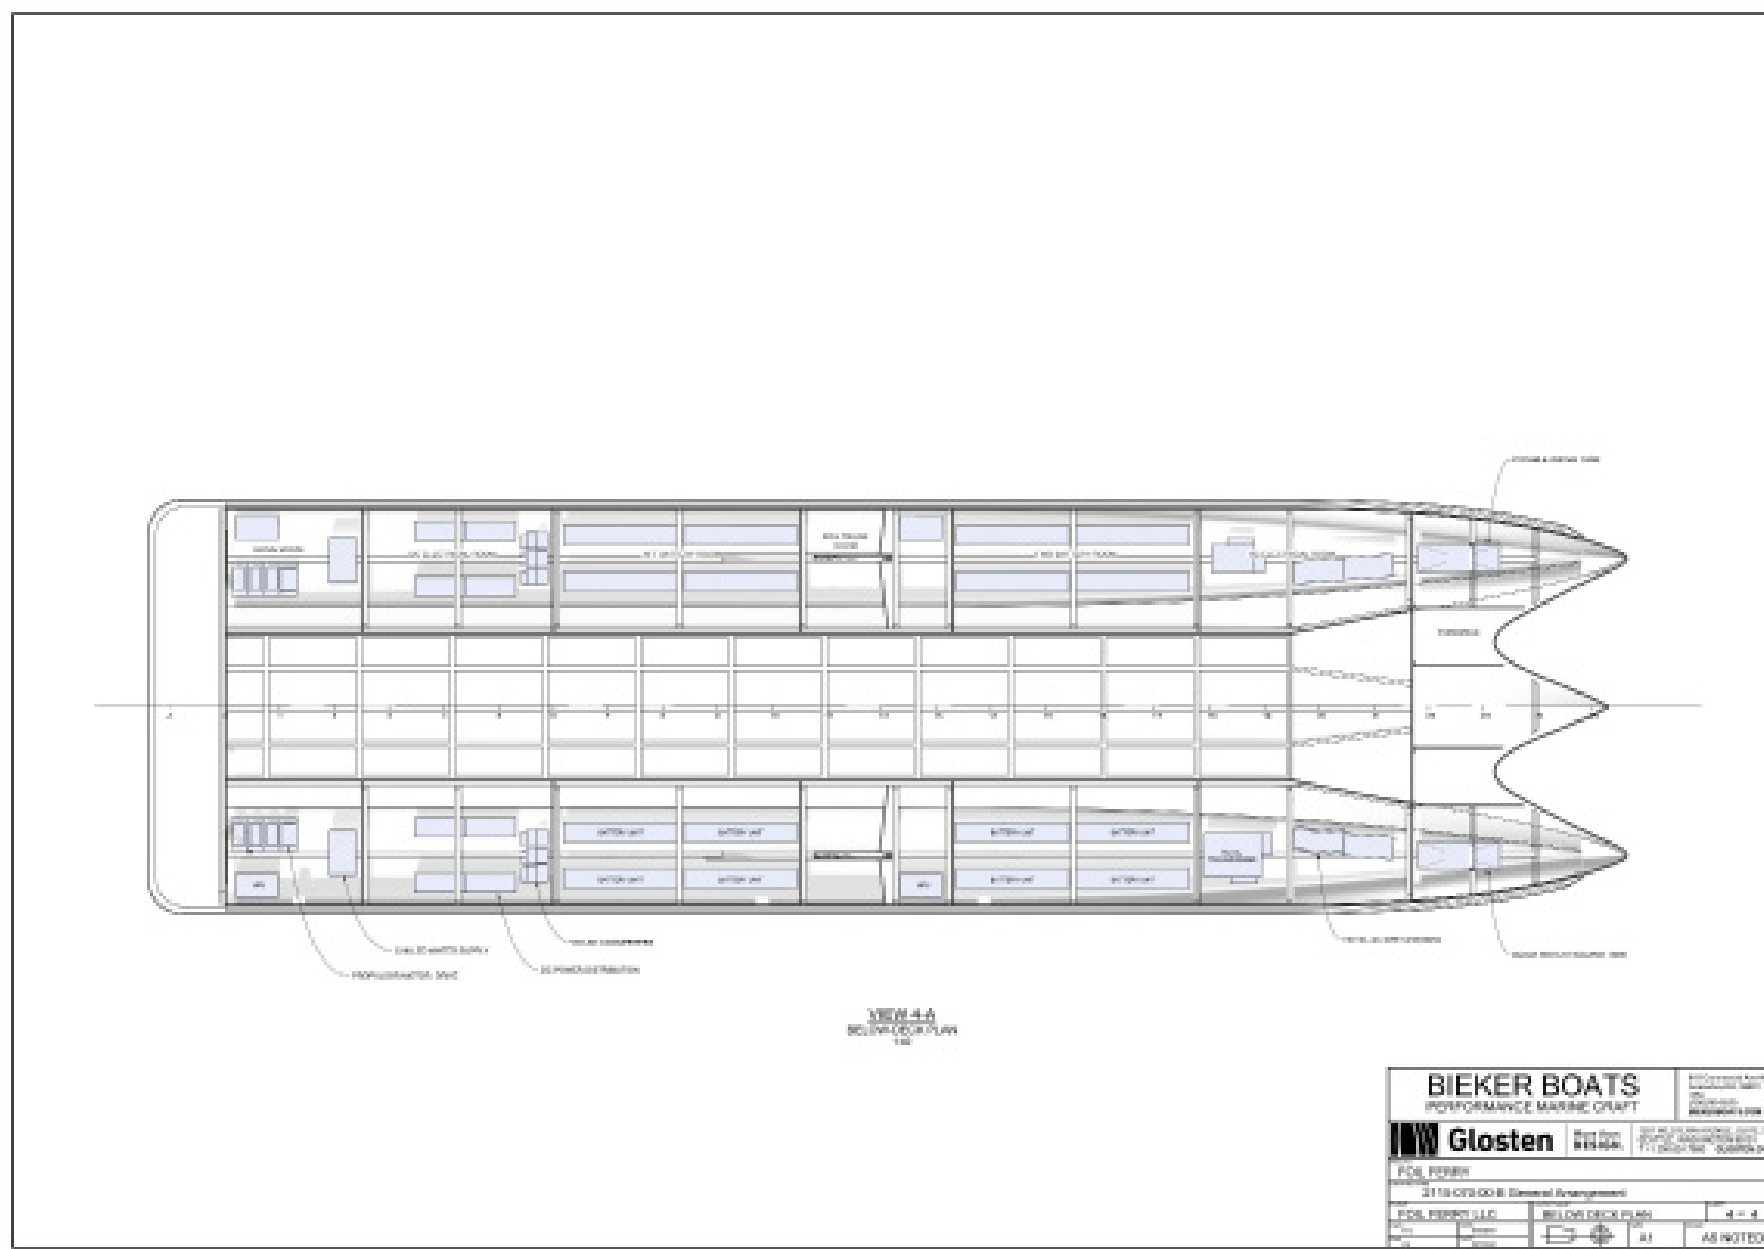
General Arrangement View 4-A, below-deck plan
